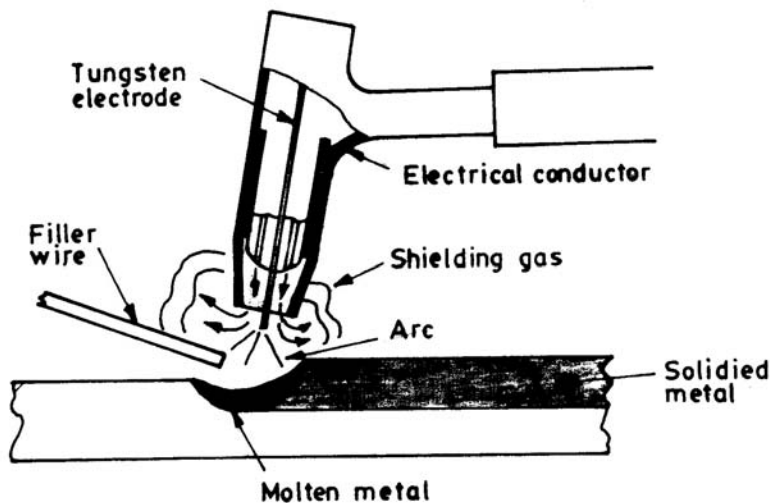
Schematic of a Gas Tungsten Arc Welding Technique
